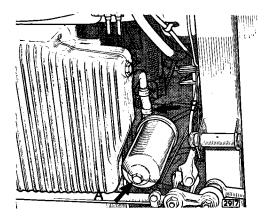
The engine filter is removed by unscrewing. the bolt "A" and withdrawing the canister and element. The oil pressure relief valve is situated behind the outlet "B".
